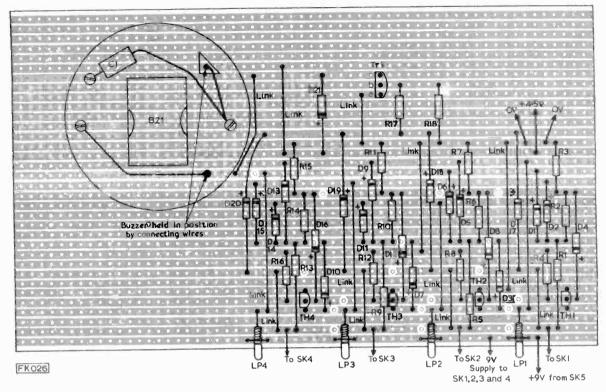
Component layout on circuit board. Note carefully the breaks in the copper rails.
